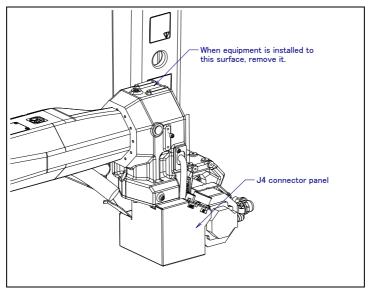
(b) Removing equipment of the ventilator hole
